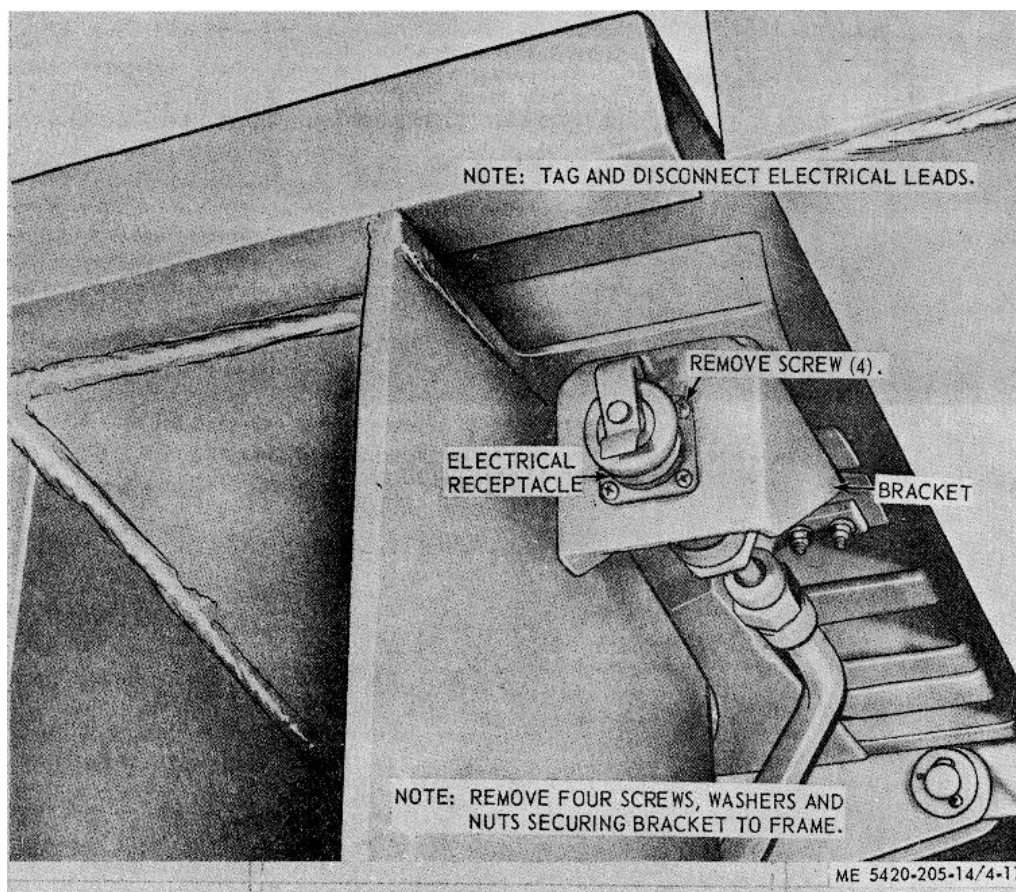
Electrical receptacle and bracket, removal and installation.
